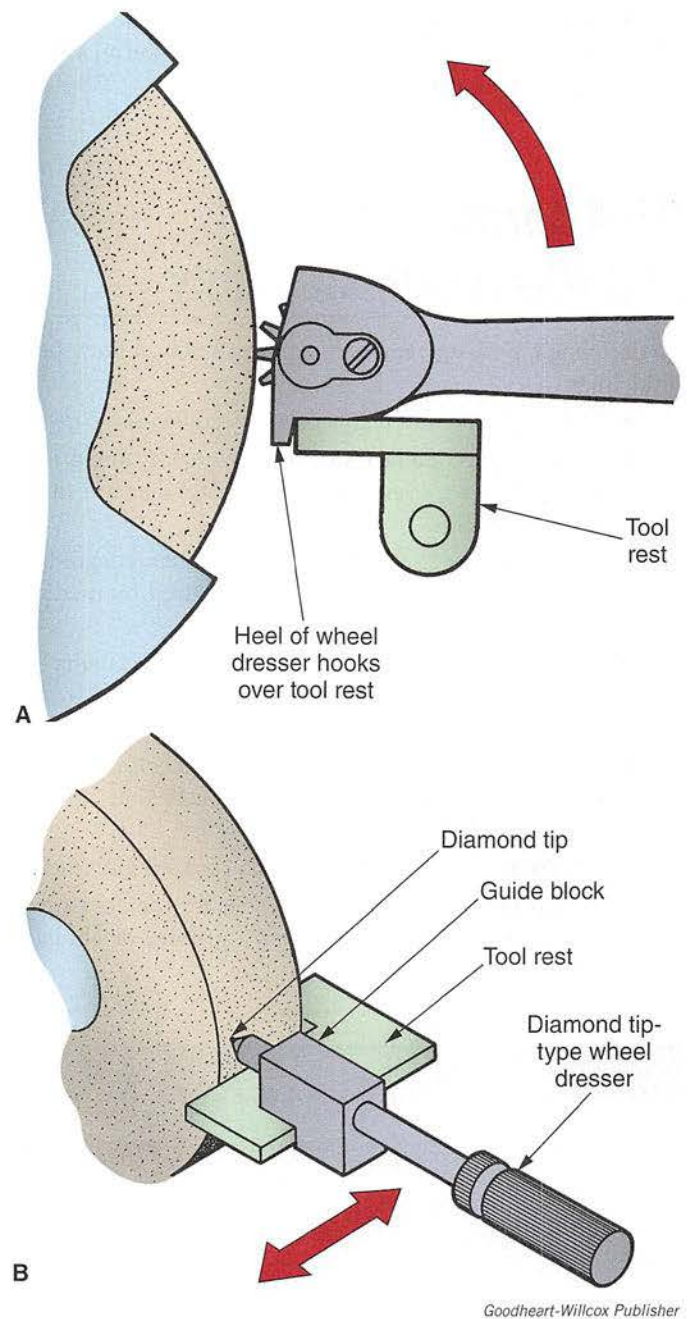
The proper way to use a mechanical wheel dresser. A—Move the tool back and forth over the face of the stone. Wear a dust mask, eye protection, and an apron when dressing wheels on grinders. B—Industrial diamonds are also used to dress and true grinding wheels. A guide block is used for grinders with slotted tool rests.
